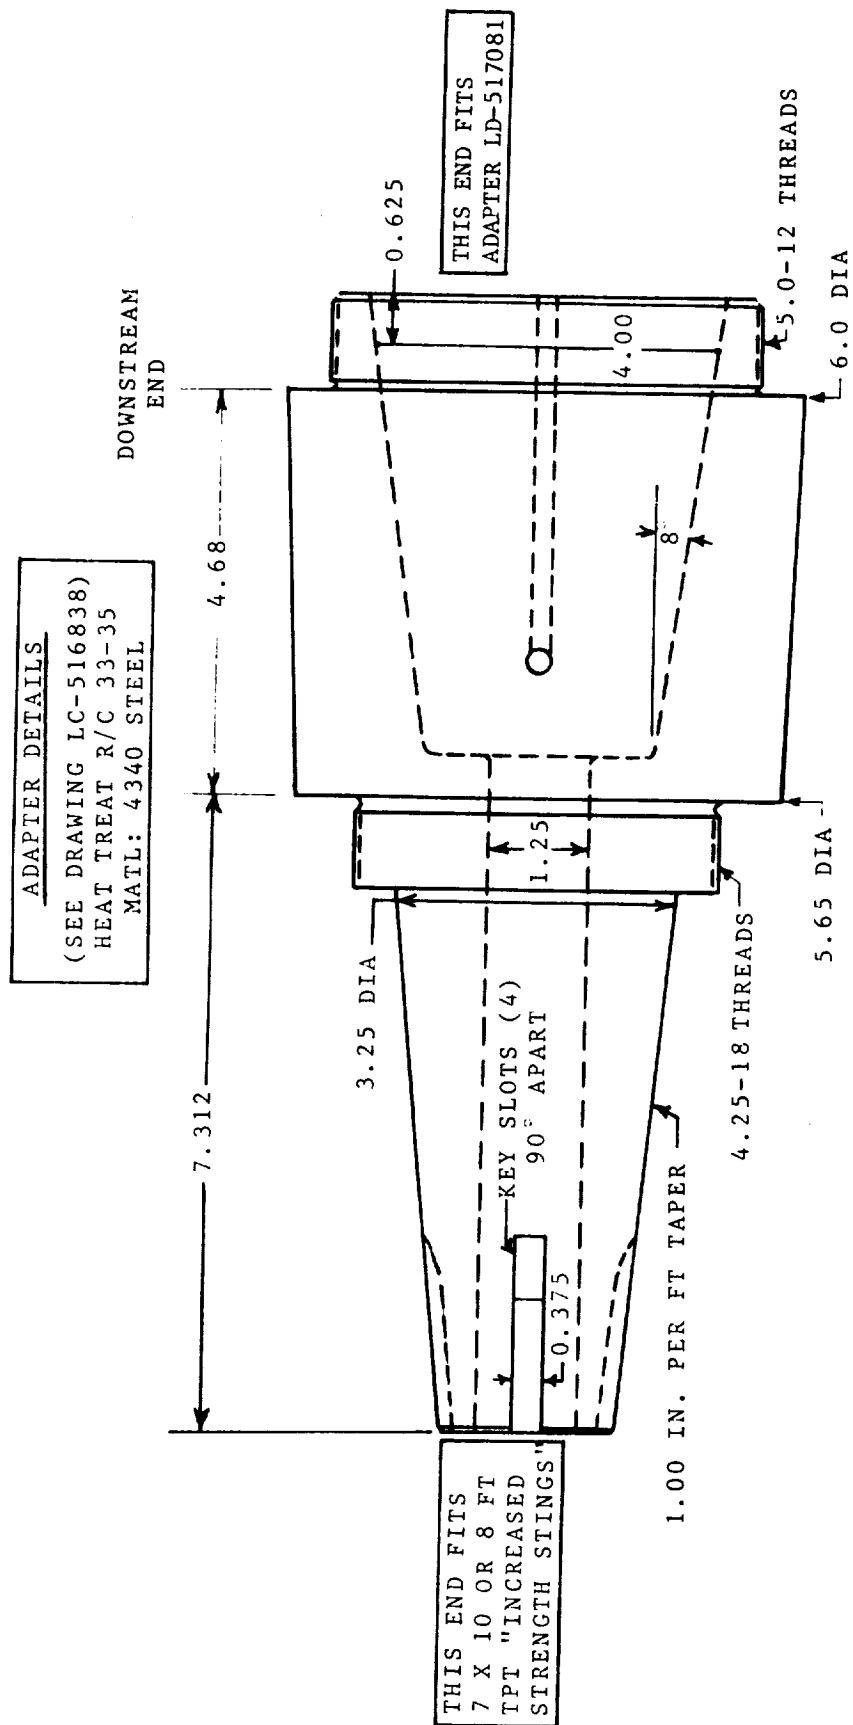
Sketch of adapter LC - 516838. (All dimensions are in inches unless otherwise indicated.)
